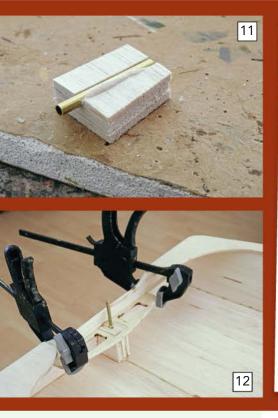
shows the rudder shaft tube being glued inside of the rudder tube mount pieces. First of all, the rudder shaft outside tube will need to be cut to exactly 1.5-inches long. It can then be sandwiched between five pieces of 1/8-inch balsa. Make sure that two pieces are glued together first, then the small pieces, with the tube, before finally gluing the other two larger pieces together. The
